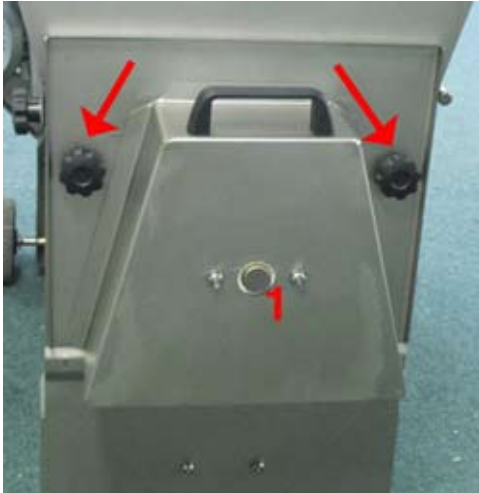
Remove the two black knobs and pull out the destemming basket. [“1” is a destemming shaft/bushing lubrication point.]
